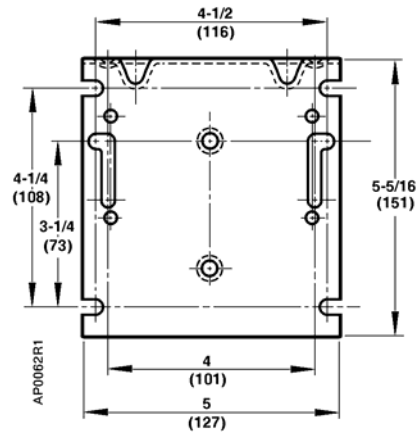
Mounting Bracket Dimensions. Dimensions in Inches (Millimeters).
